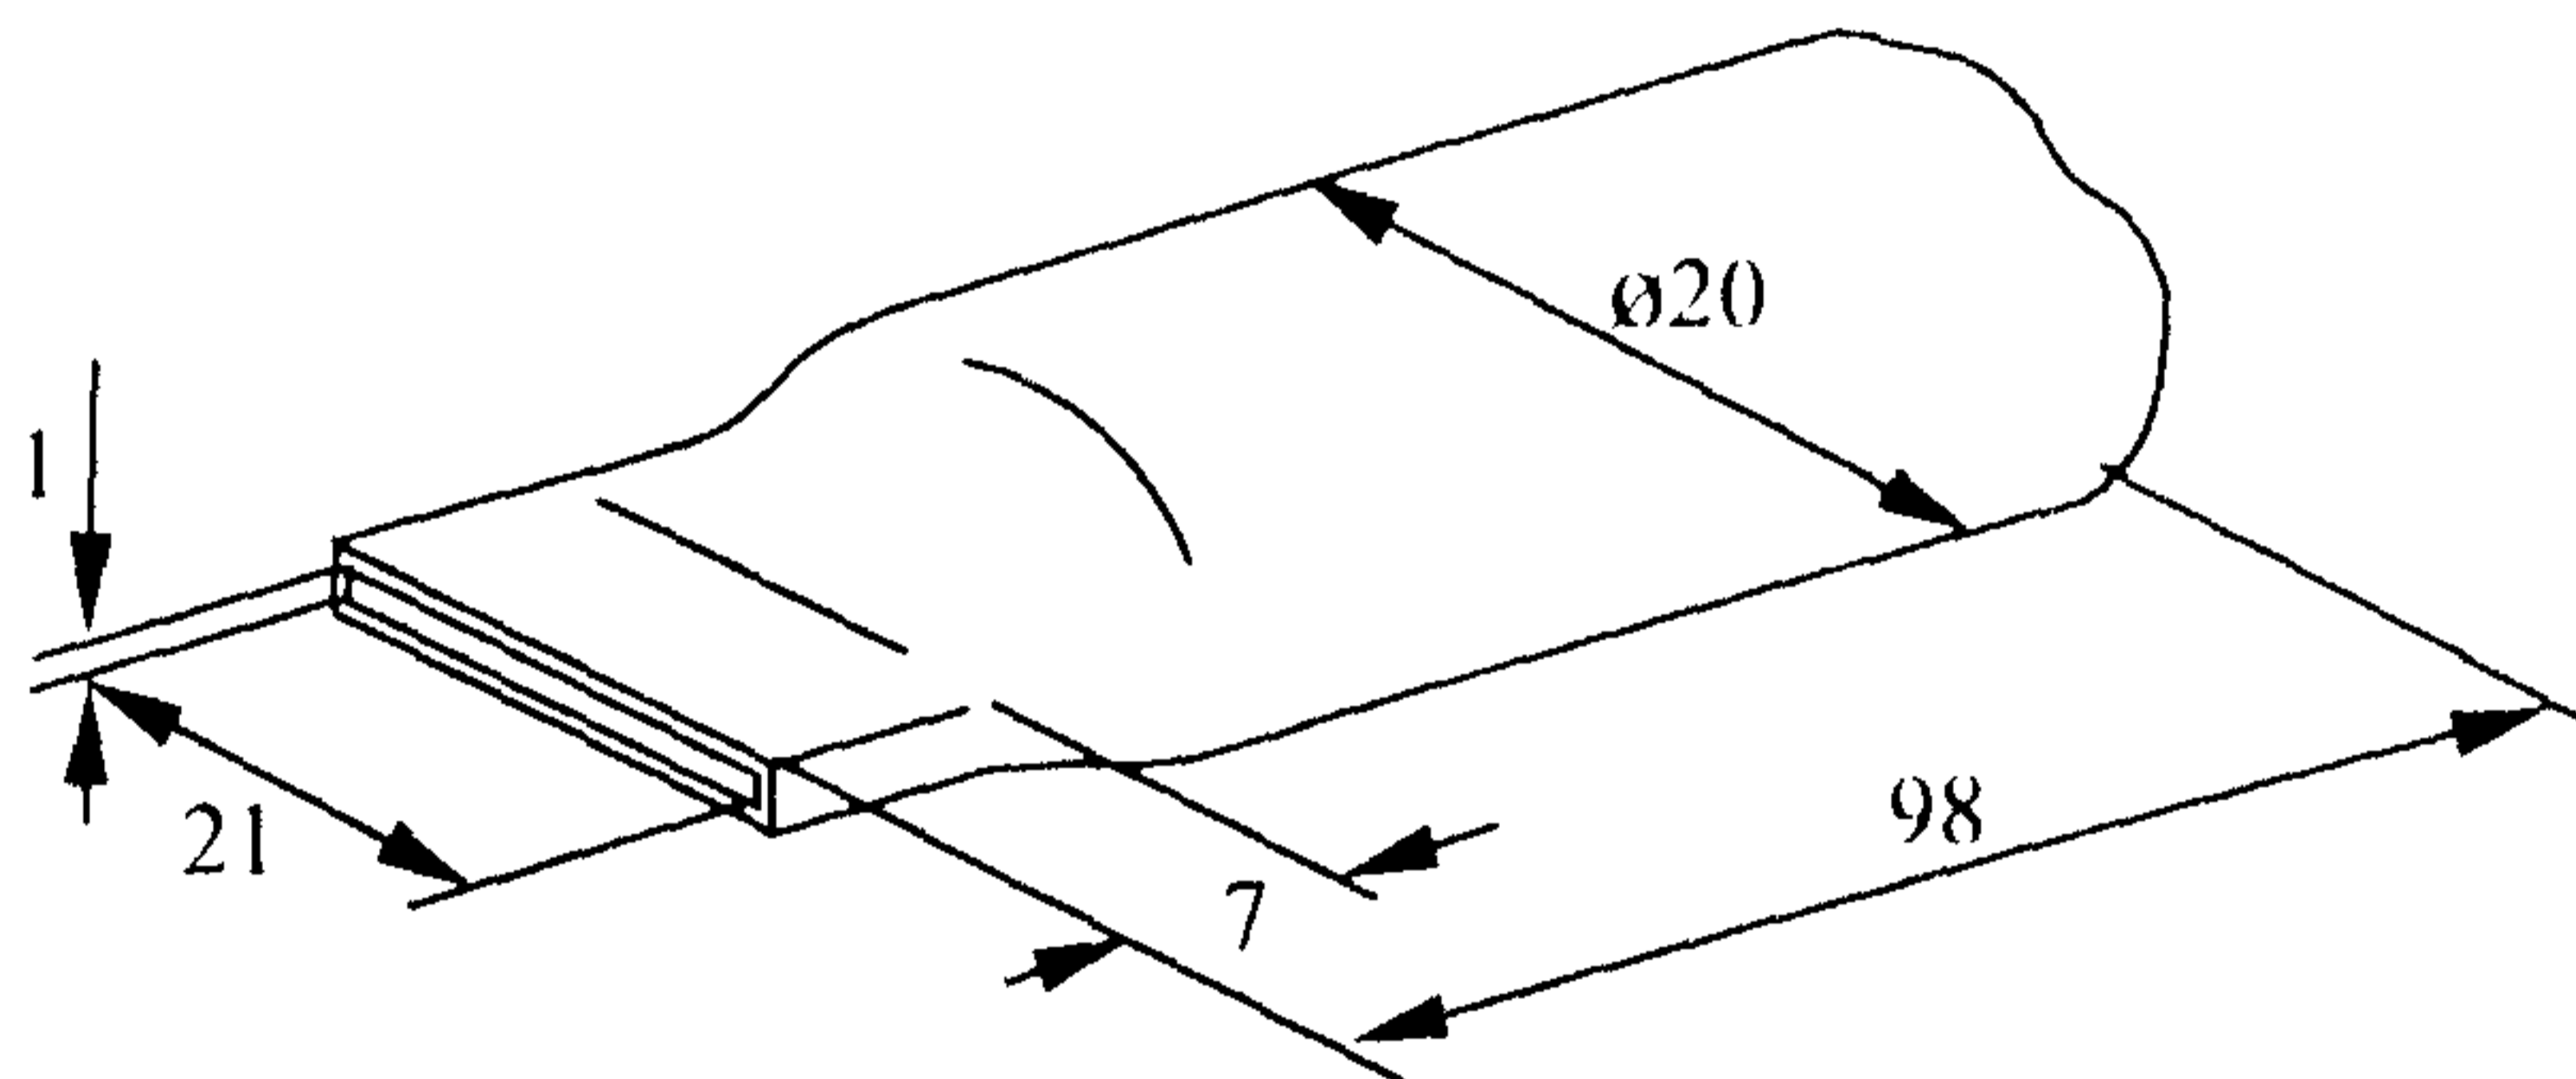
Schematic drawing of the cylindrical nozzle with rectangular outlet gap.
